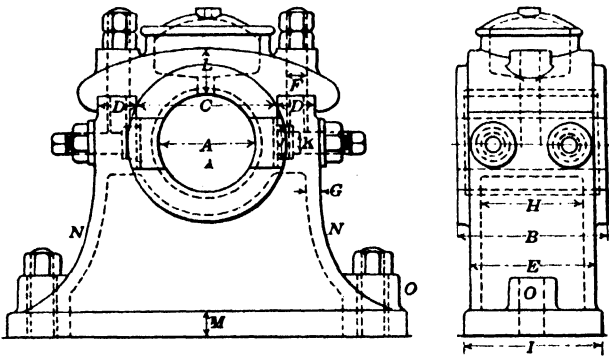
Heavy pedestal bearings with table of dimensions.
